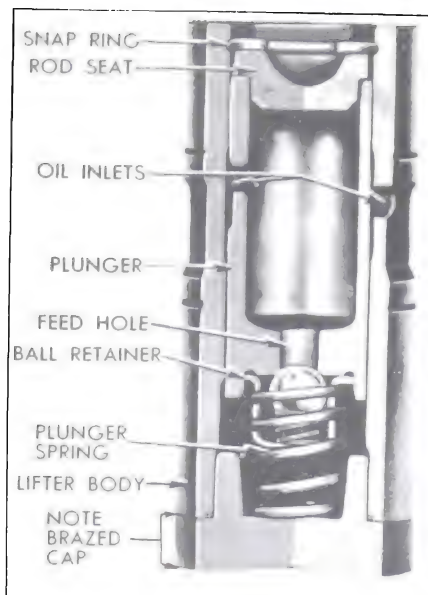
Hydraulic Valve Lifter, Sectional View
